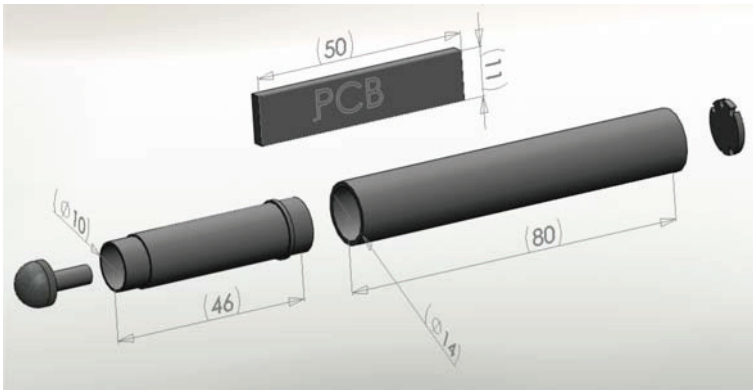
Rendering of the sensor head assembly. Shows the lens-chip-ferrule mount, the dimensions of the transimpedance amplifier and the mounts holding these parts together.
